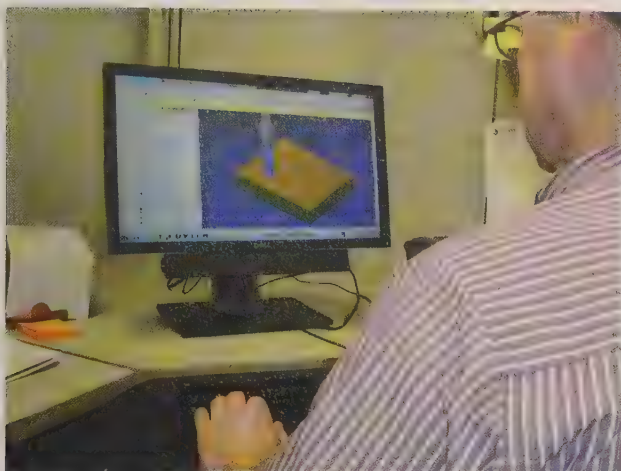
A CNC programmer utilizing a CAD/CAM system to program a CNC machine (Courtesy of Fox Valley Technical College).
